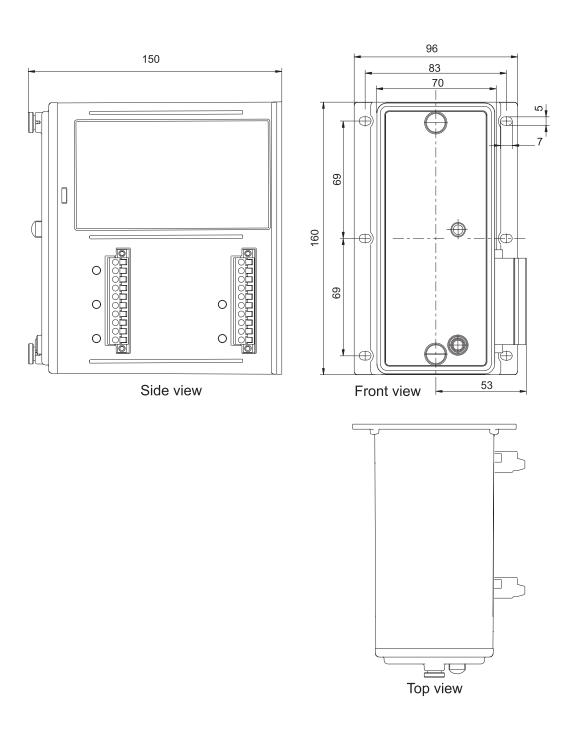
Dimension and mounting details of Self-powered feeder protection REJ603 with HMI
